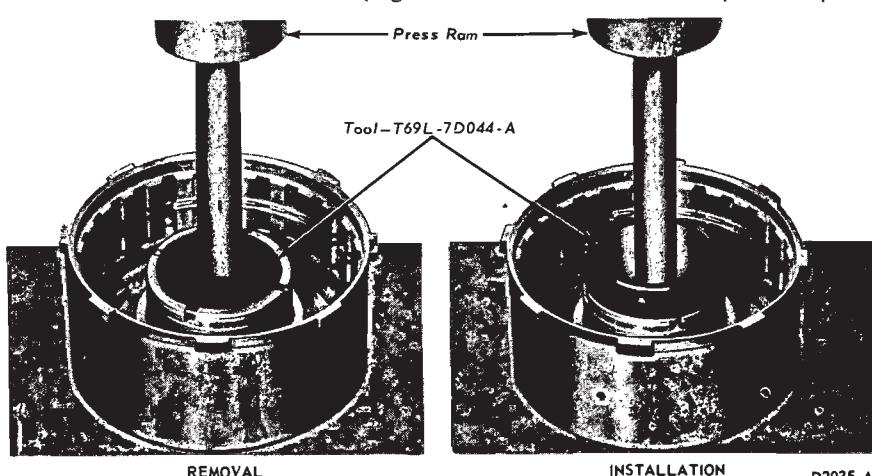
Replacing Reverse-High Clutch Rear Bushing
